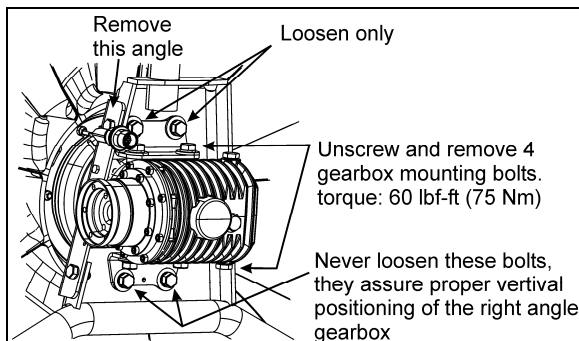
RIGHT ANGLE GEARBOX MOUNTING 05126
